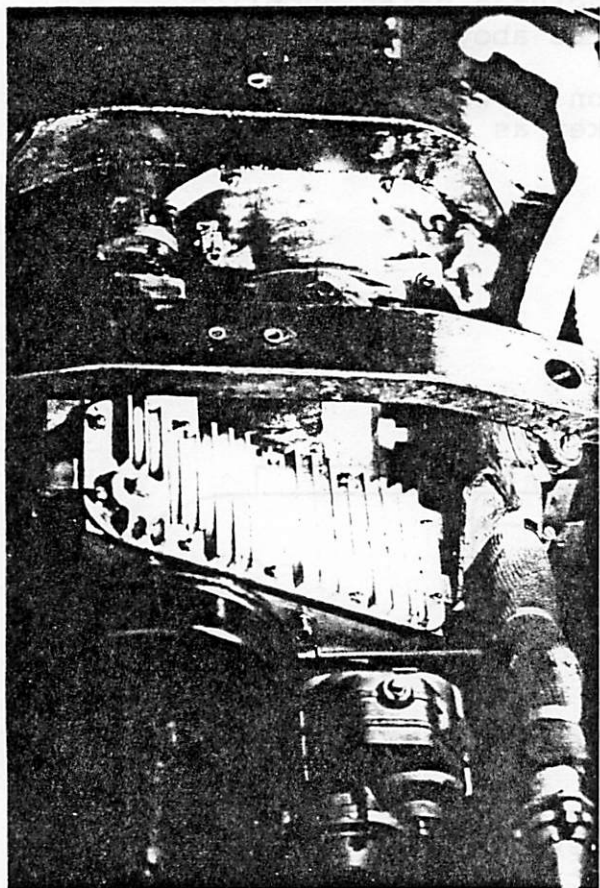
MODIFICATION TO BRING EARLIER EXHAUST BRACKET TO PROFILE OF LATER BRACKET
